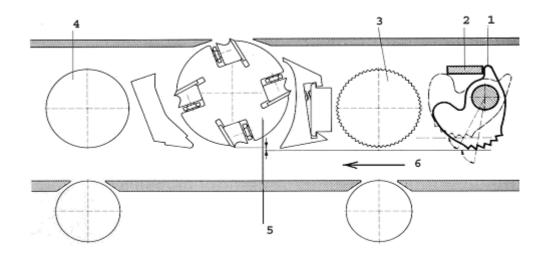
b) — Example of surface planing and thicknessing machine (set up for thicknessing)
